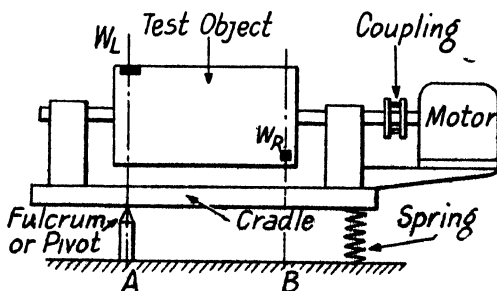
SHOWING PRINCIPLE OF DYNAMIC BALANCING MACHINES
